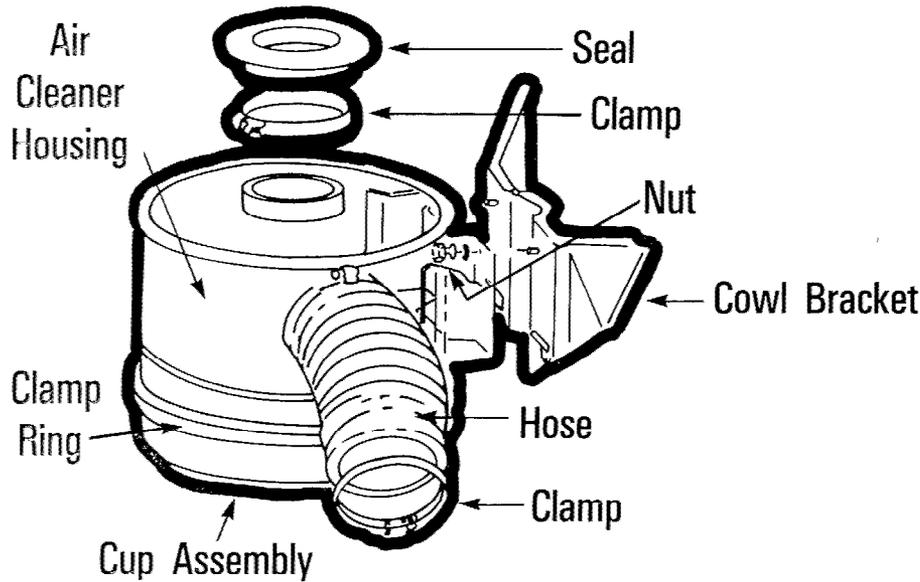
Diesel Engine Typical Dry Type Air Cleaner (6-71N)
